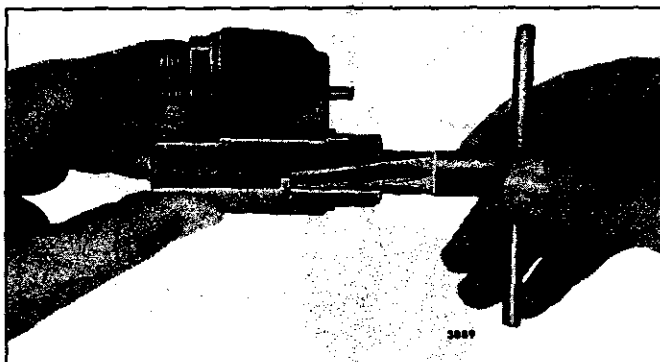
Cleaning Injector Body Ring with Tool J 21089
